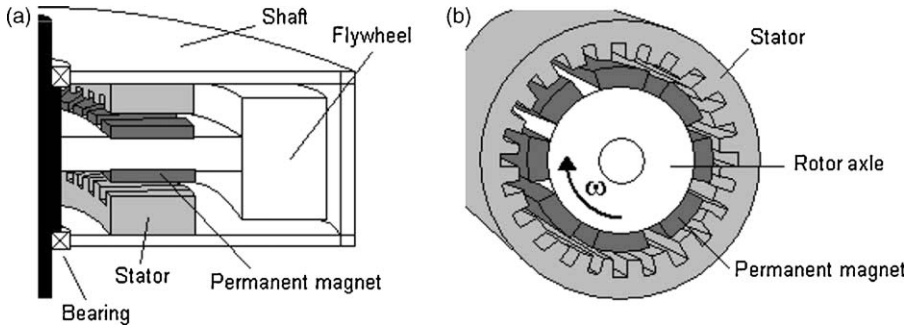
(a) show an AFPM machine arrangement and (b) show an RFPM machine arrangement.
